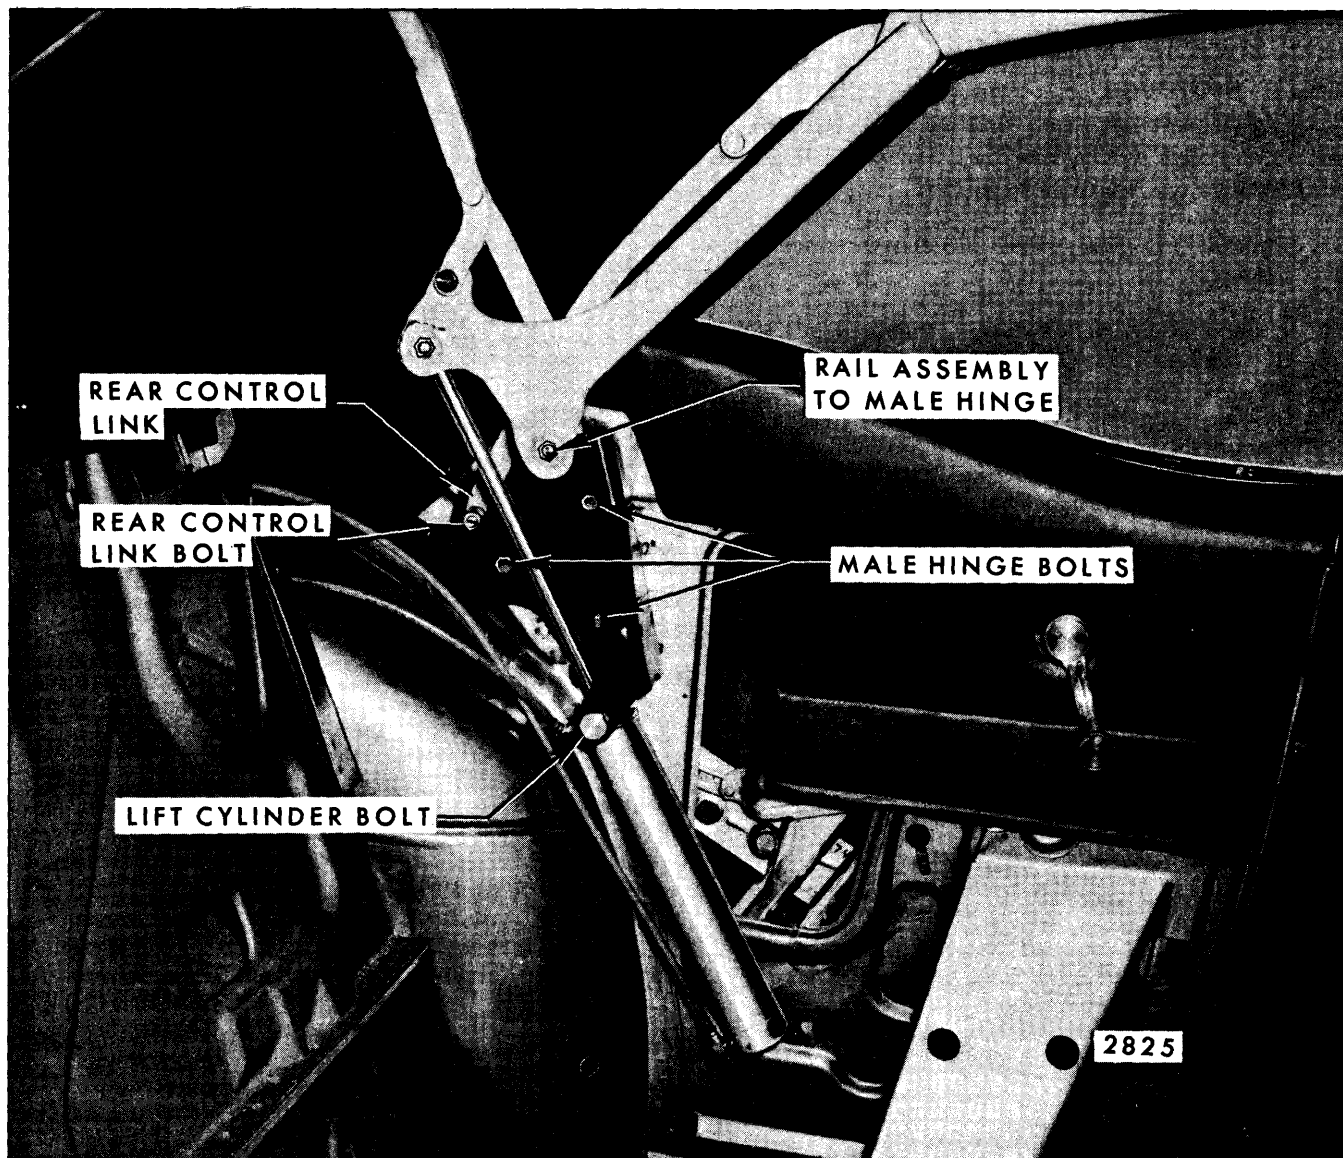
Folding Top Linkage Attachment - "A" Styles Shown, "B & C" Typical
